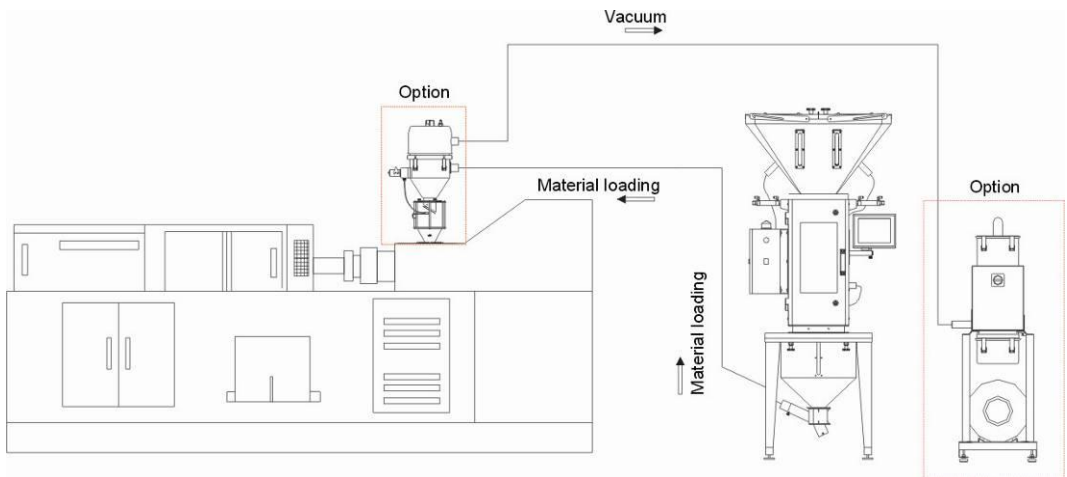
SGB-600-4 (Install SGB Machine on a Floor Stand)
